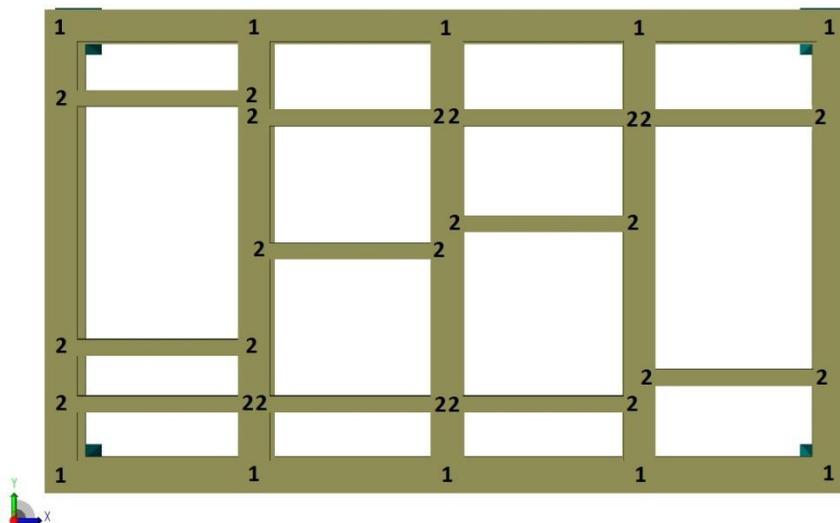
Symbols and illustrations for welded joints in the skid
